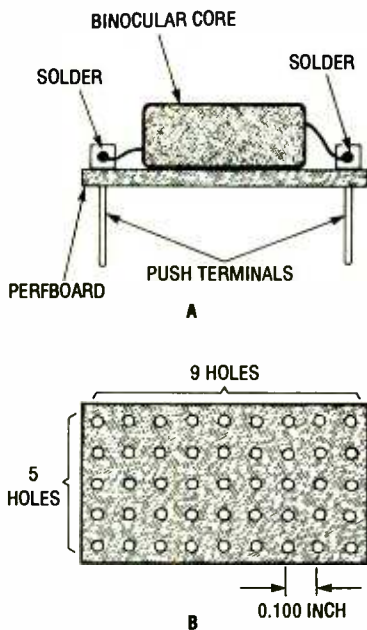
This method of winding and mounting binocular transformers results in a header for easy installment of the coil.
